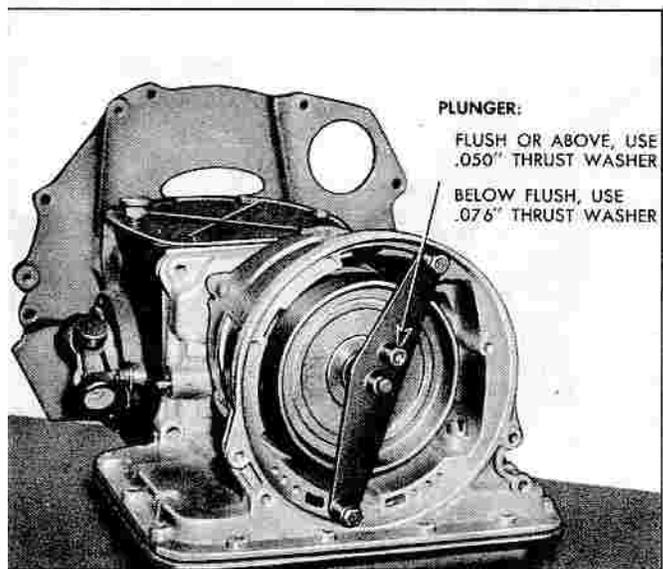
E-56—Gauging Clutch Drum Thrust Washer with J-8371
